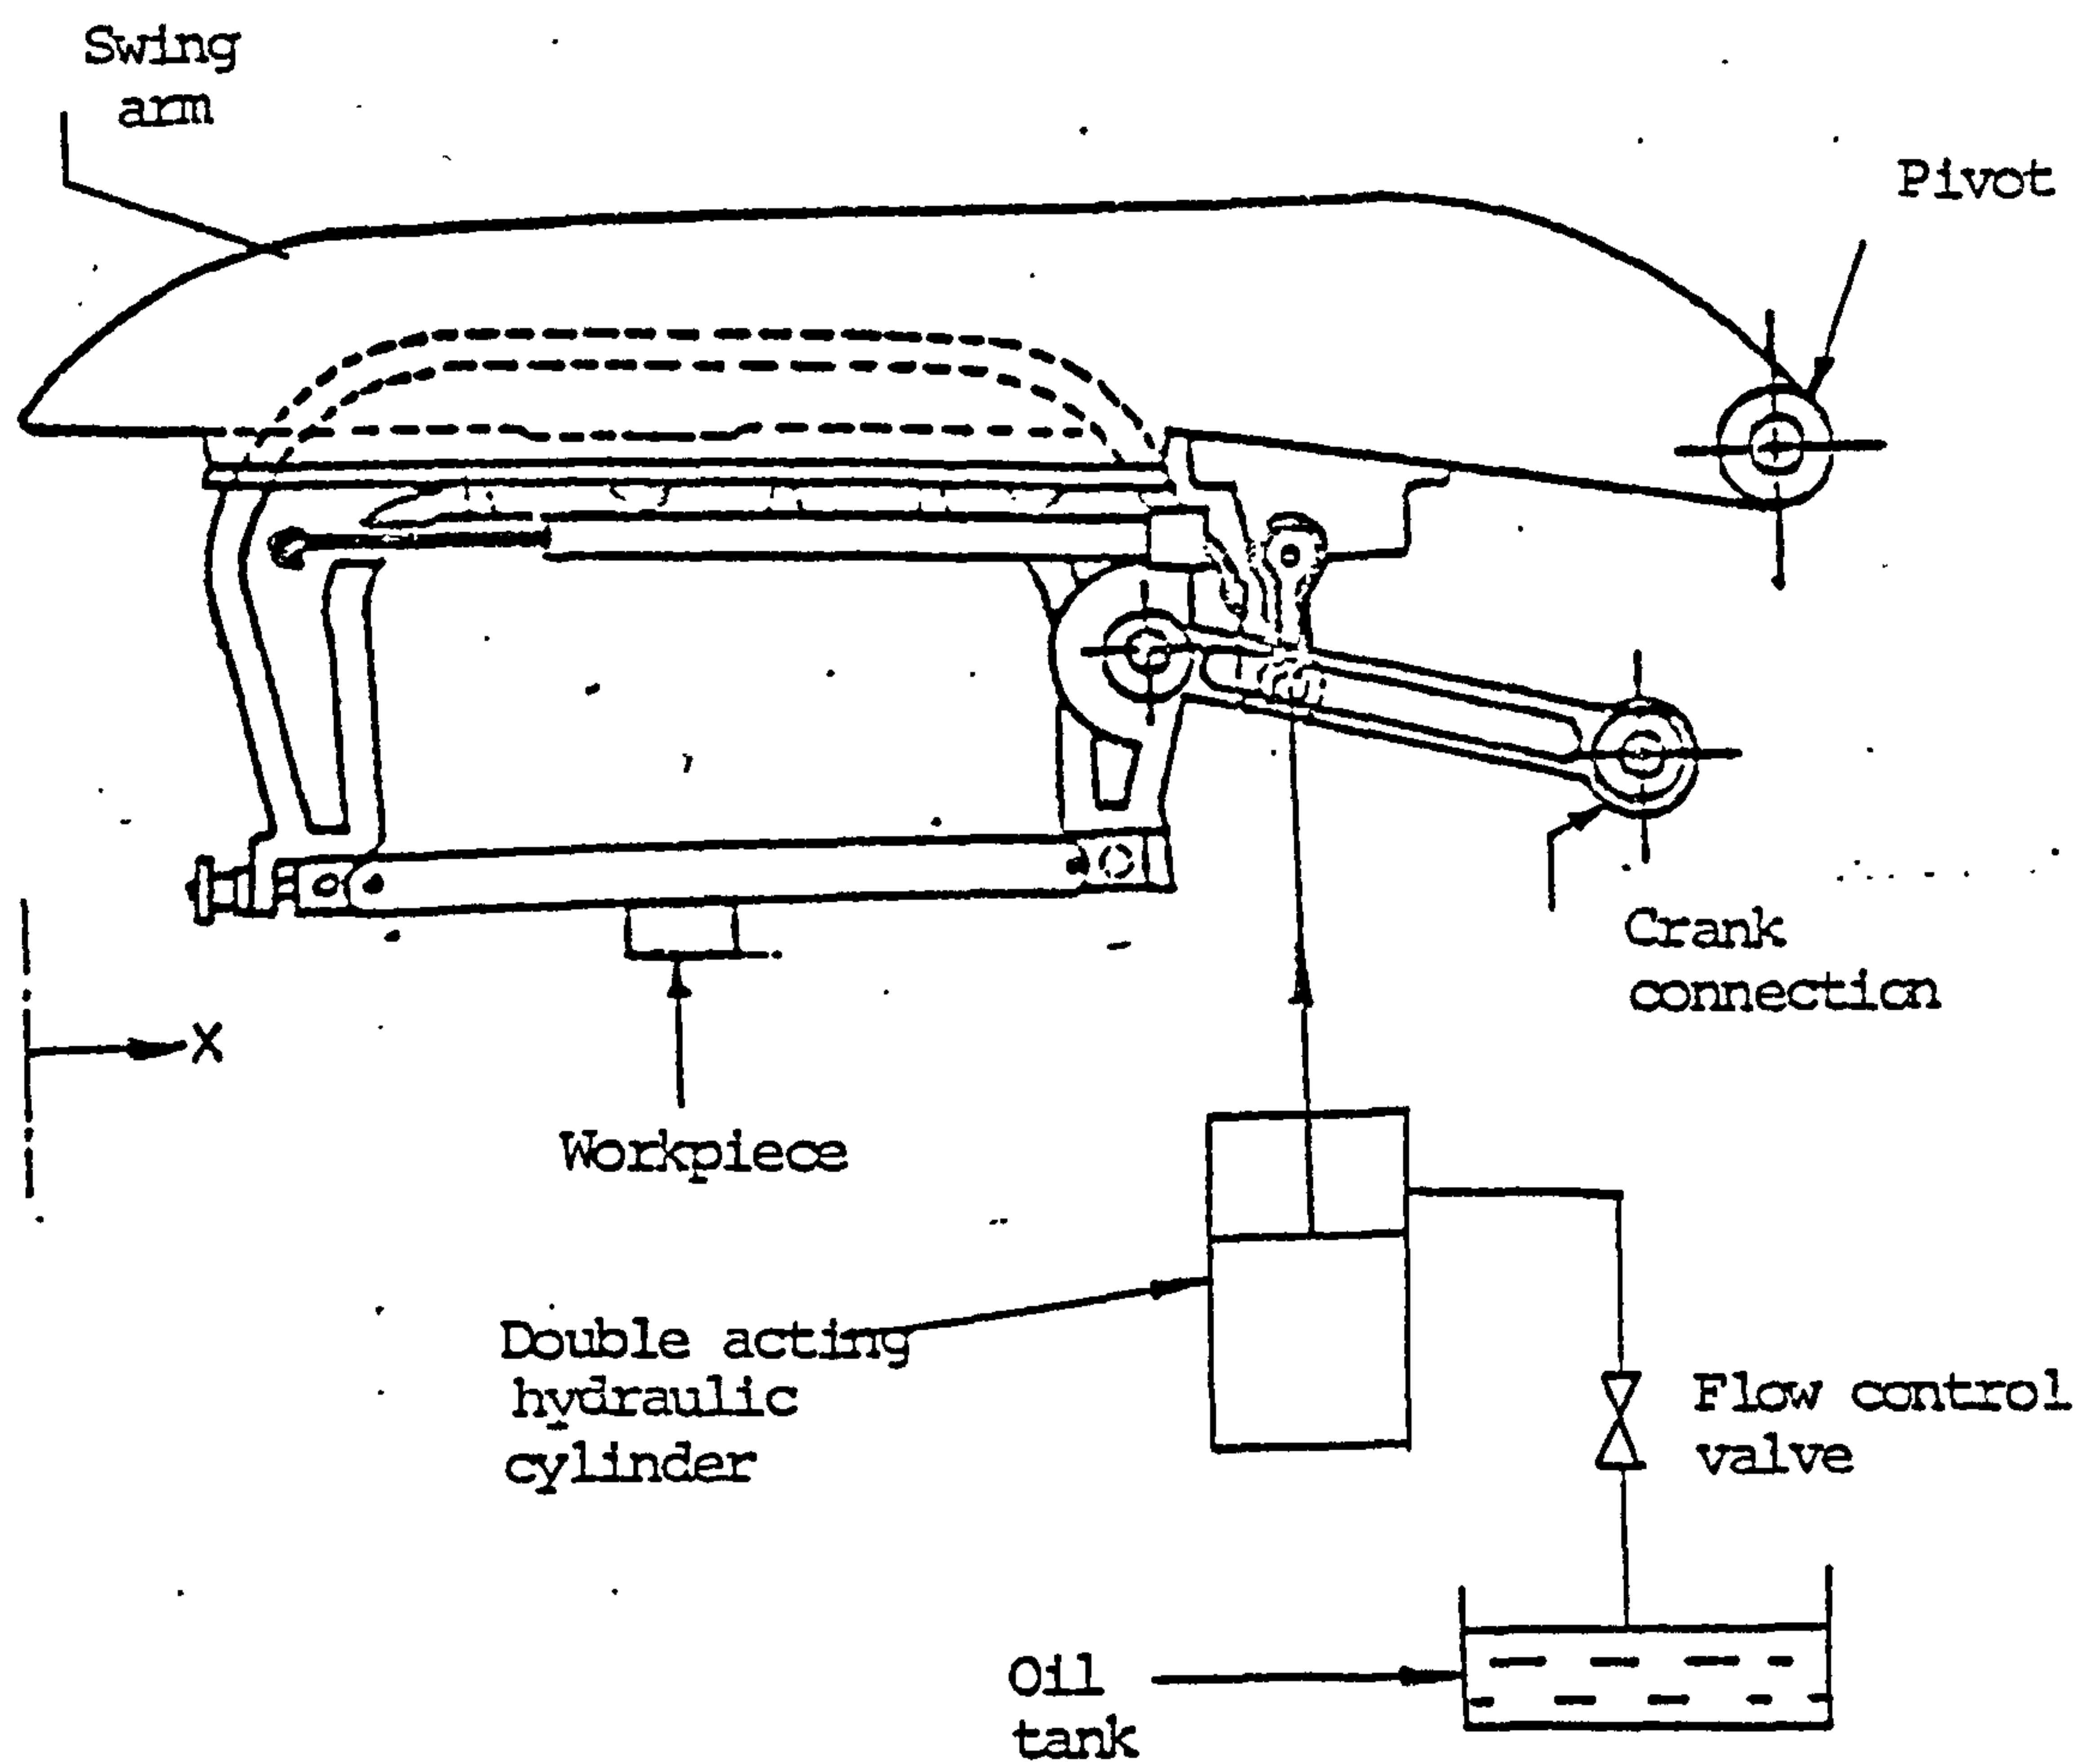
Simplified hydraulic unit of the Wickstead hydraulic sawing machine
